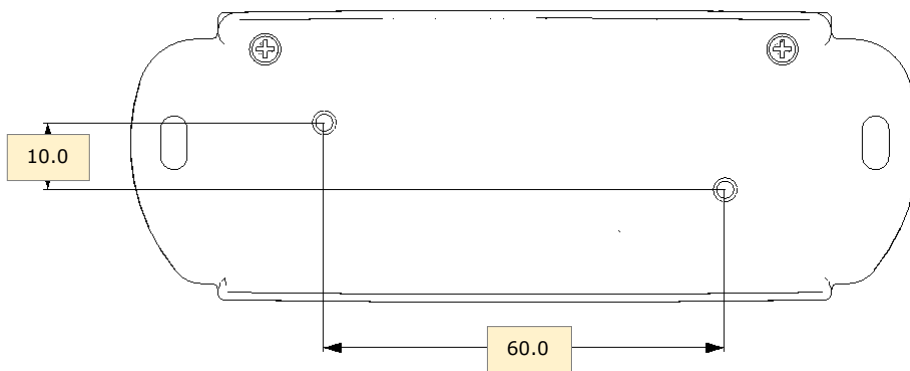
LDSBus Quad T-Junction 2 Dimension – Bottom View
